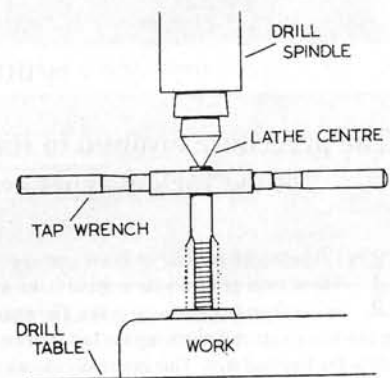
A method of ensuring sweet axial alignment when using the drilling machine for tapping large holes.
